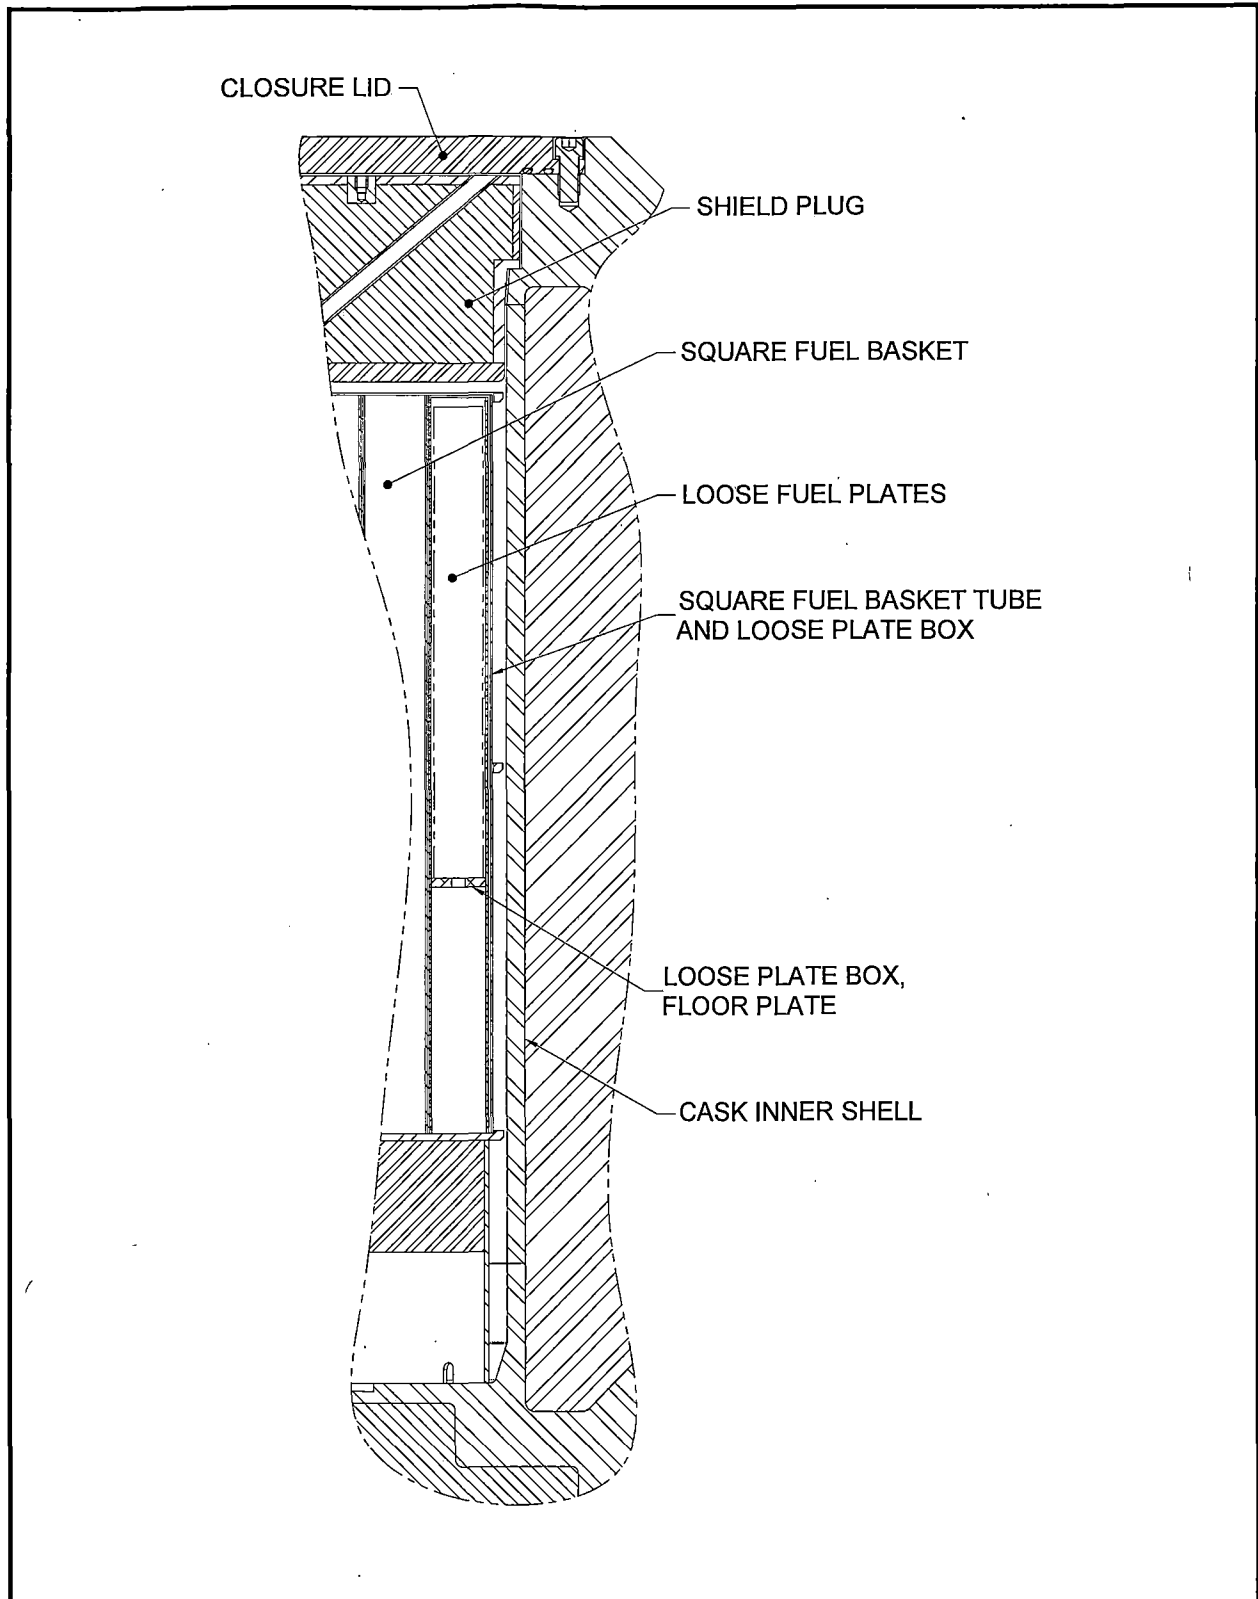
Cross Section View of BRR Package Showing Basket, Loose Plate Box, and Loose Plates
